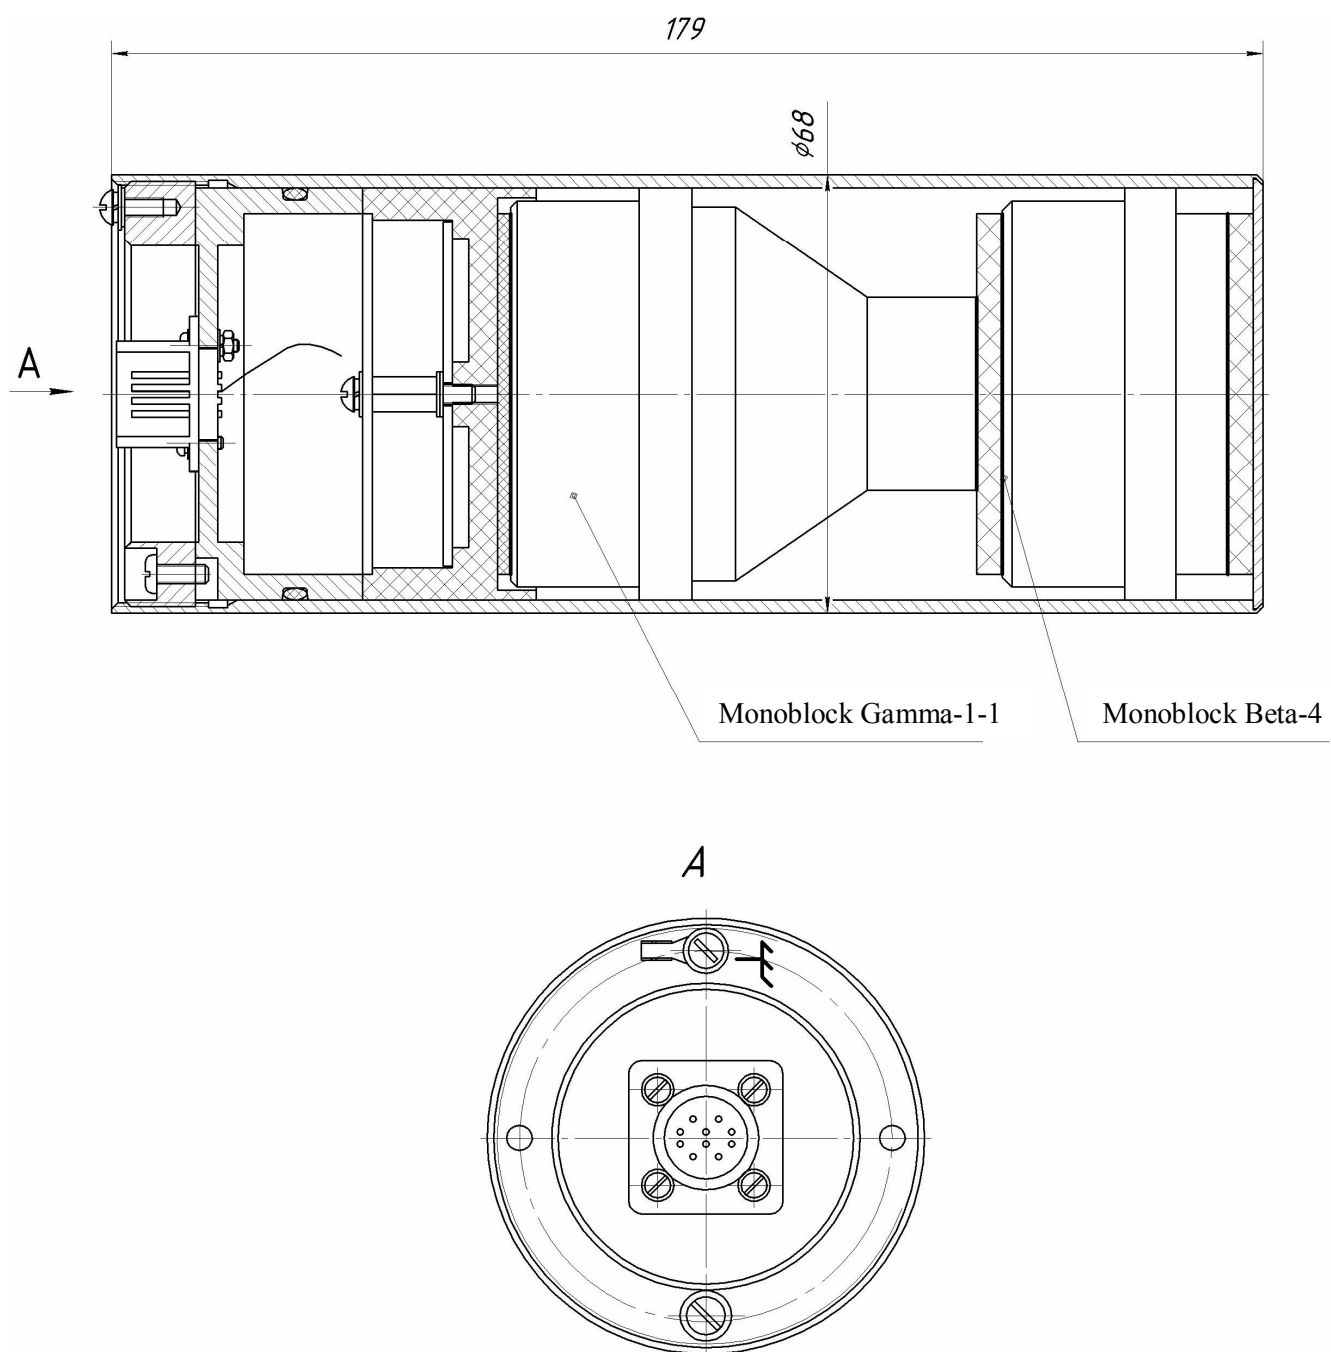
Overall and fitting dimensions (basic modification 01)
